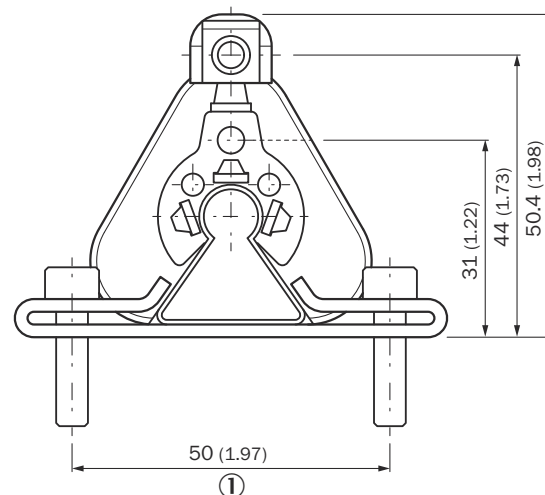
Dimensions and distances for MAG-S-H29-xx position magnet on DAX® Slider
